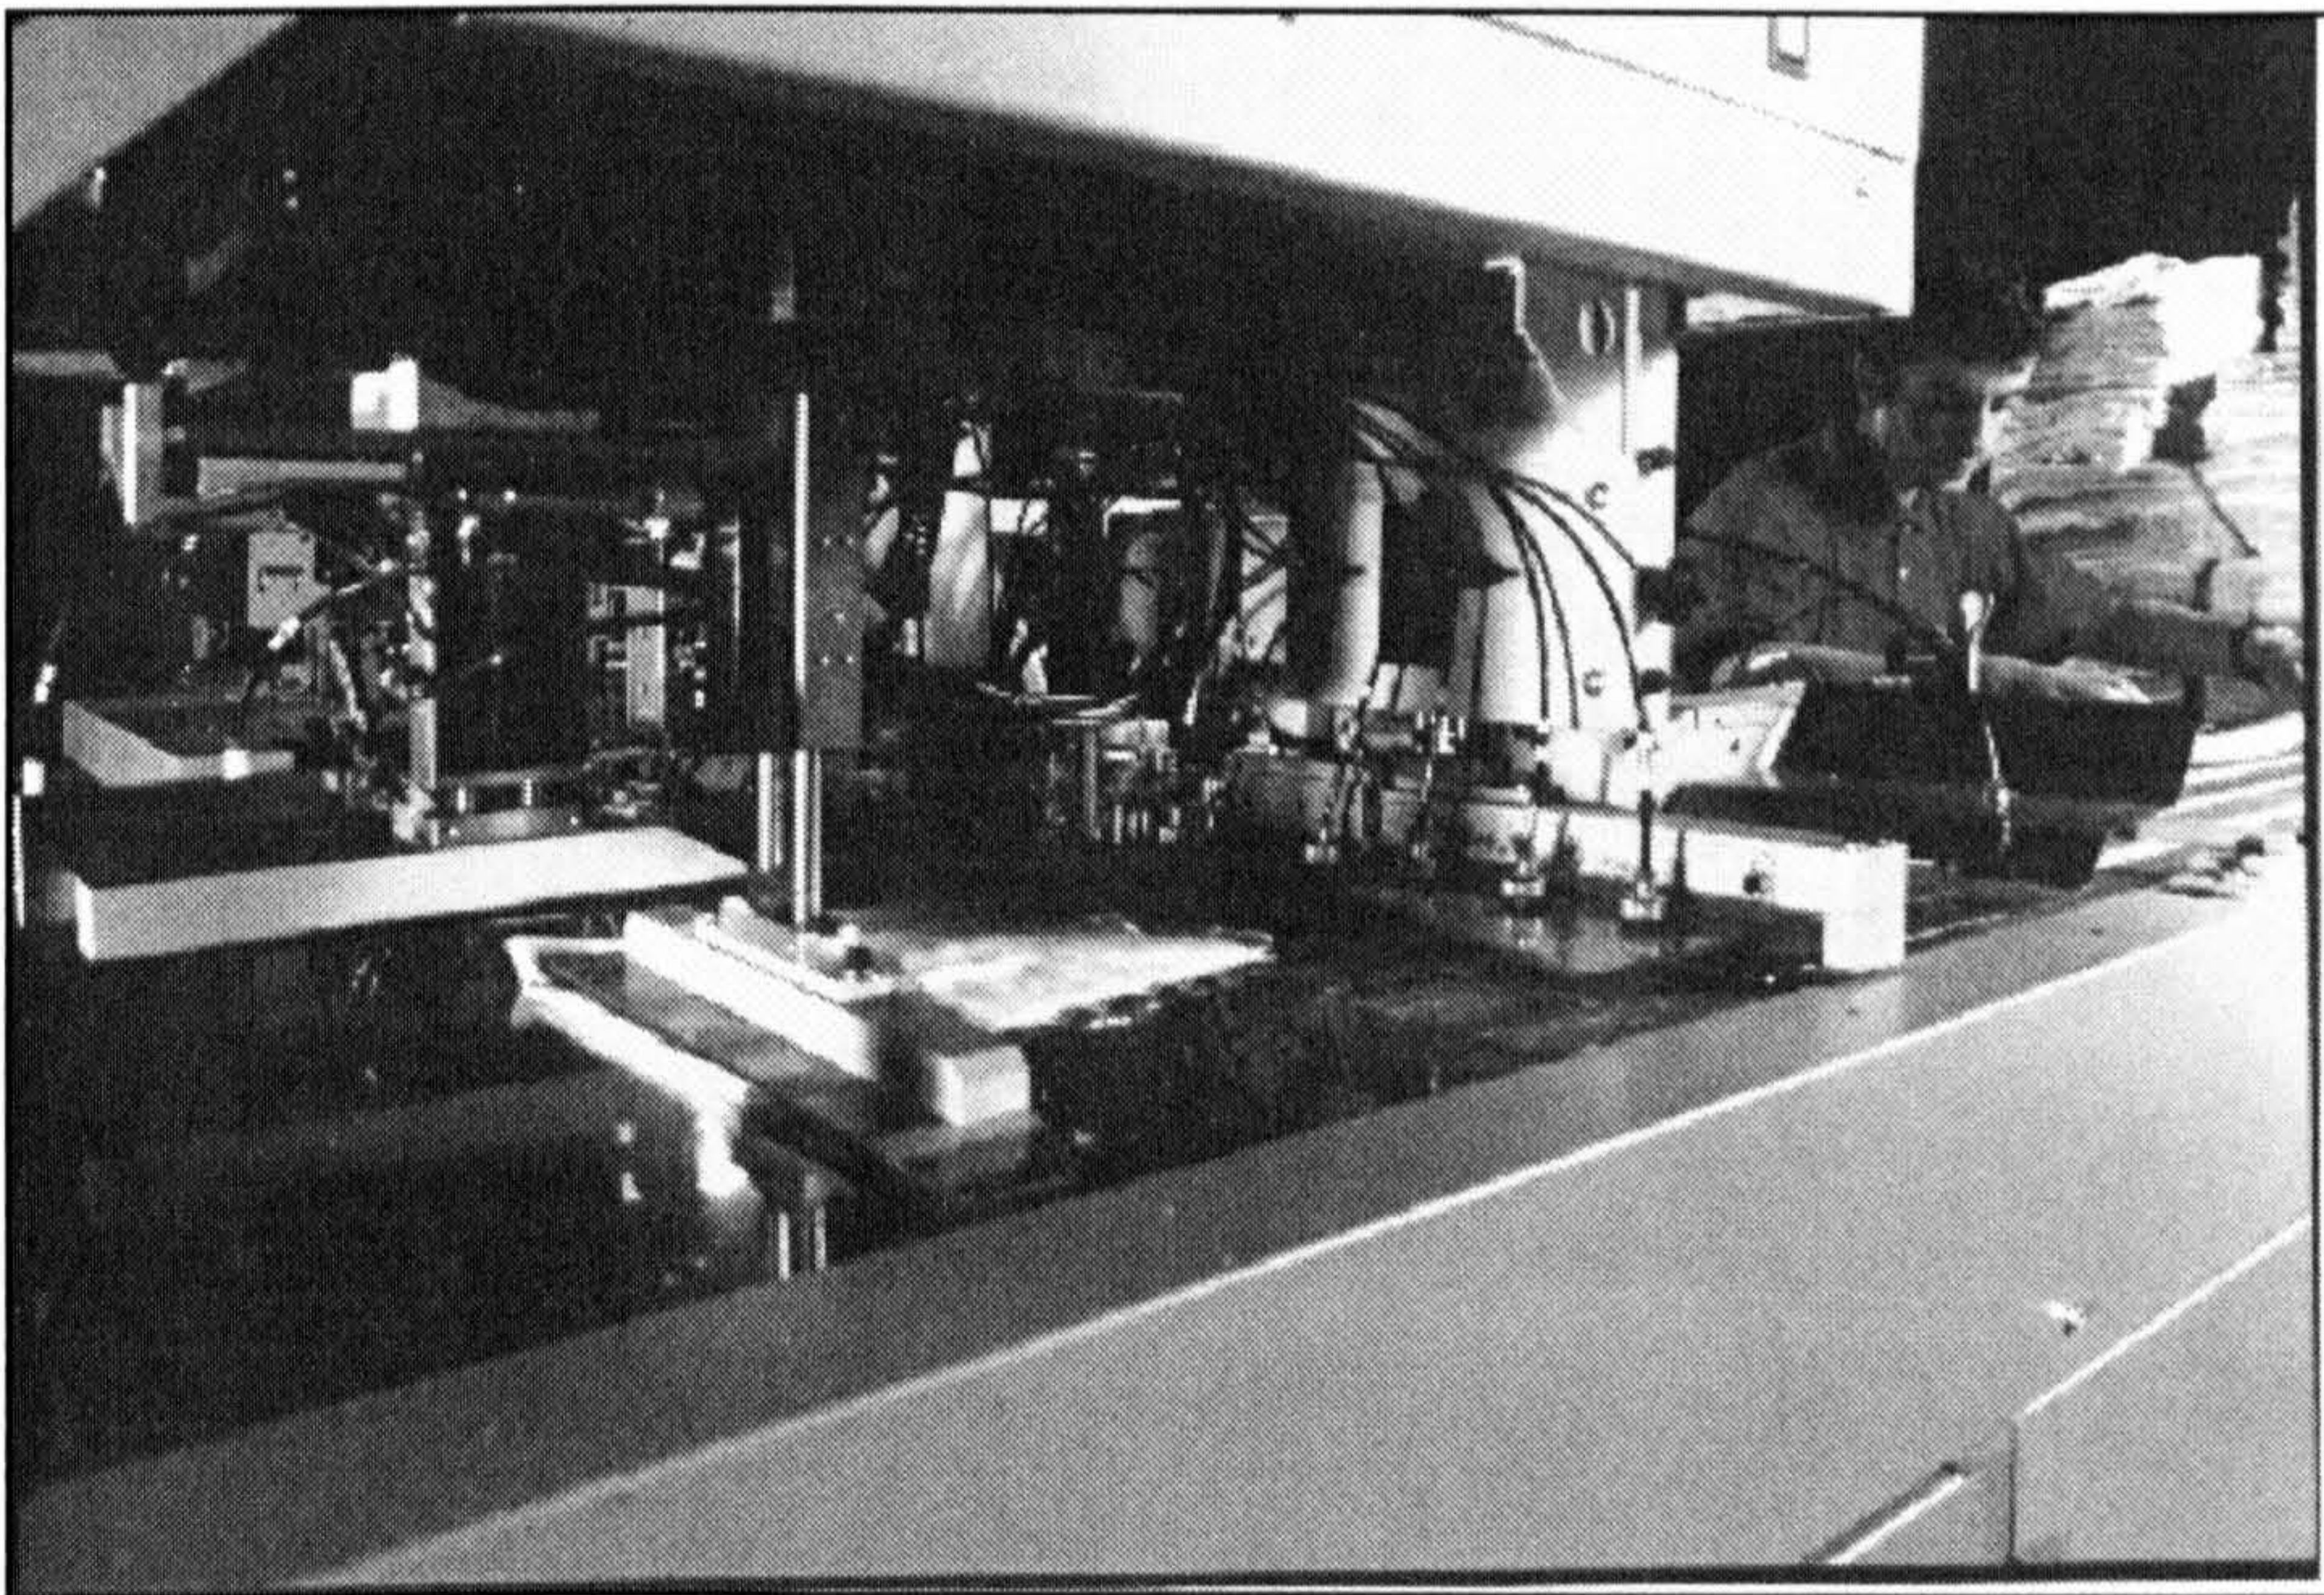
The AAC 411 Hem & Close Sleeve machine in operation, showing the part of the machine designed to lift, fold and turn the sleeve before feeding it into the next automated sewing machine head.
